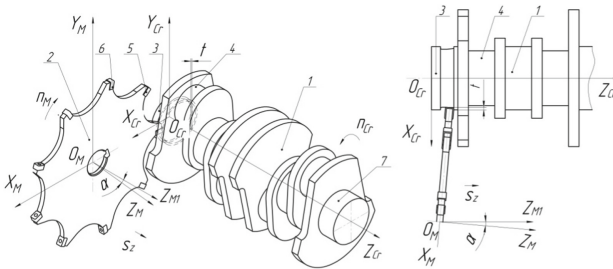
Crankshaft milling scheme with crossed tool axes and parts.
